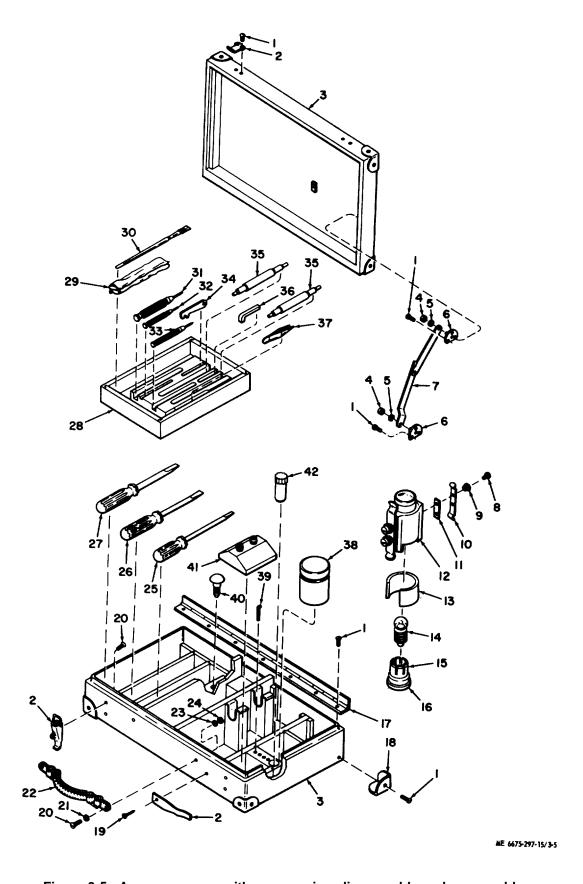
Accessory case with accessories, disassembly and reassembly.
